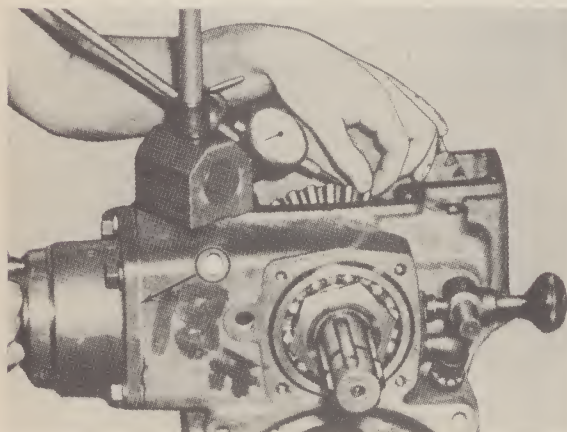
Checking backlash of pto belt pulley bevel gears (6 speed tractors) which is controlled by shims.
